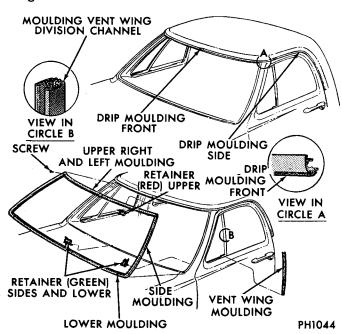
Windshield and Drip Mouldings (D-5,6,8, W6)
